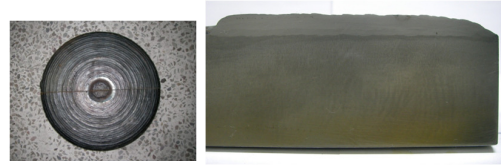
Weld specimens and cross-sectional pictures
